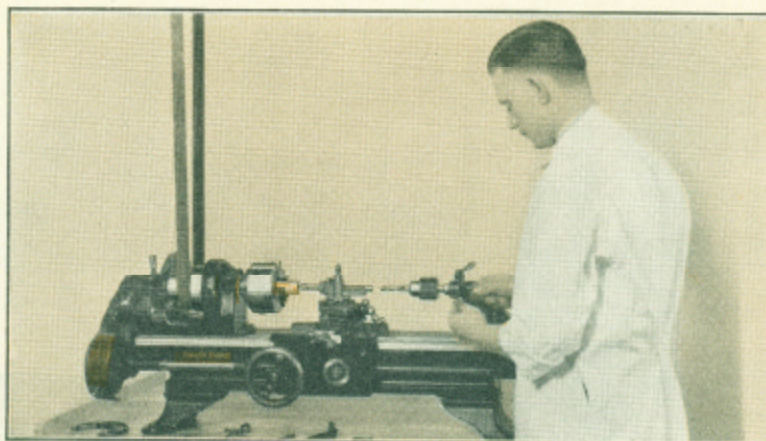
Making a Bushing in the 9-inch Junior Lathe
